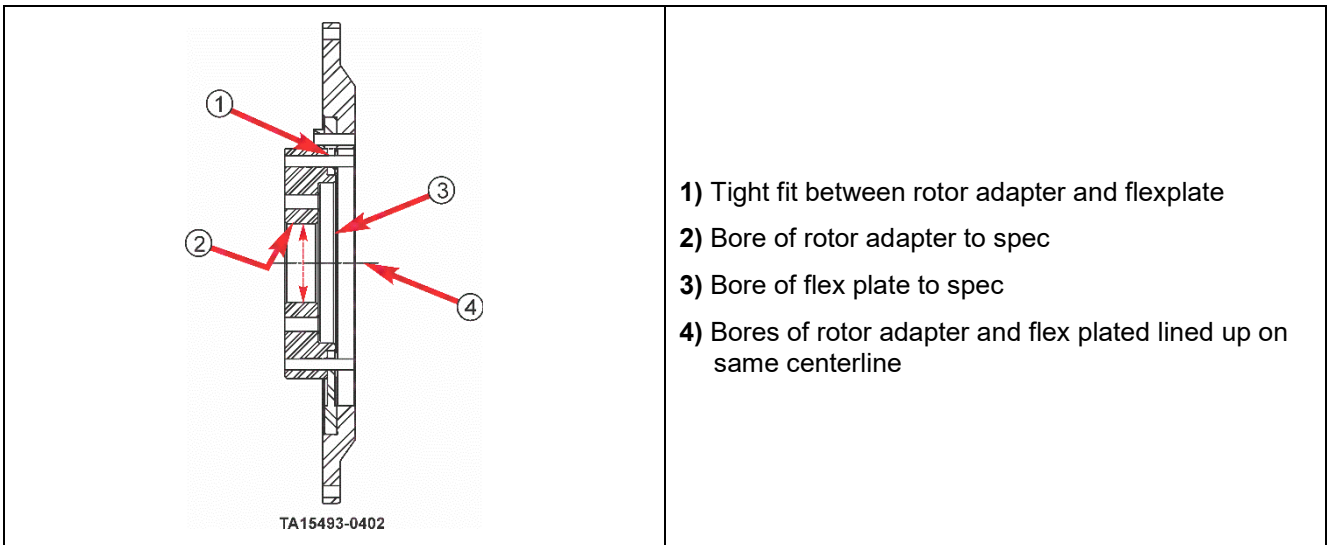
Measure diameter on rotor adapter and flexplate - (1 of 2)
